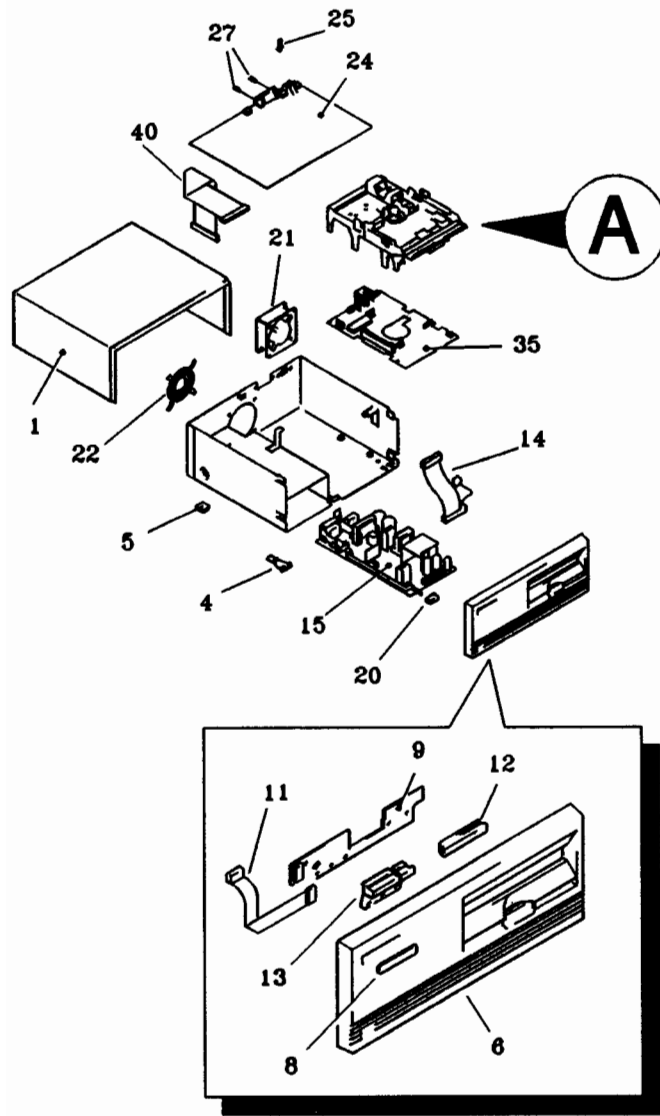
HP 9144A Exploded View (sheet 1 of 2)
